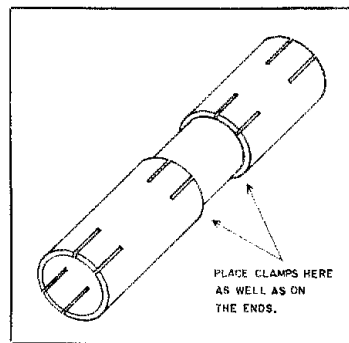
Bushings mounted in place on the 20-meter trap.
